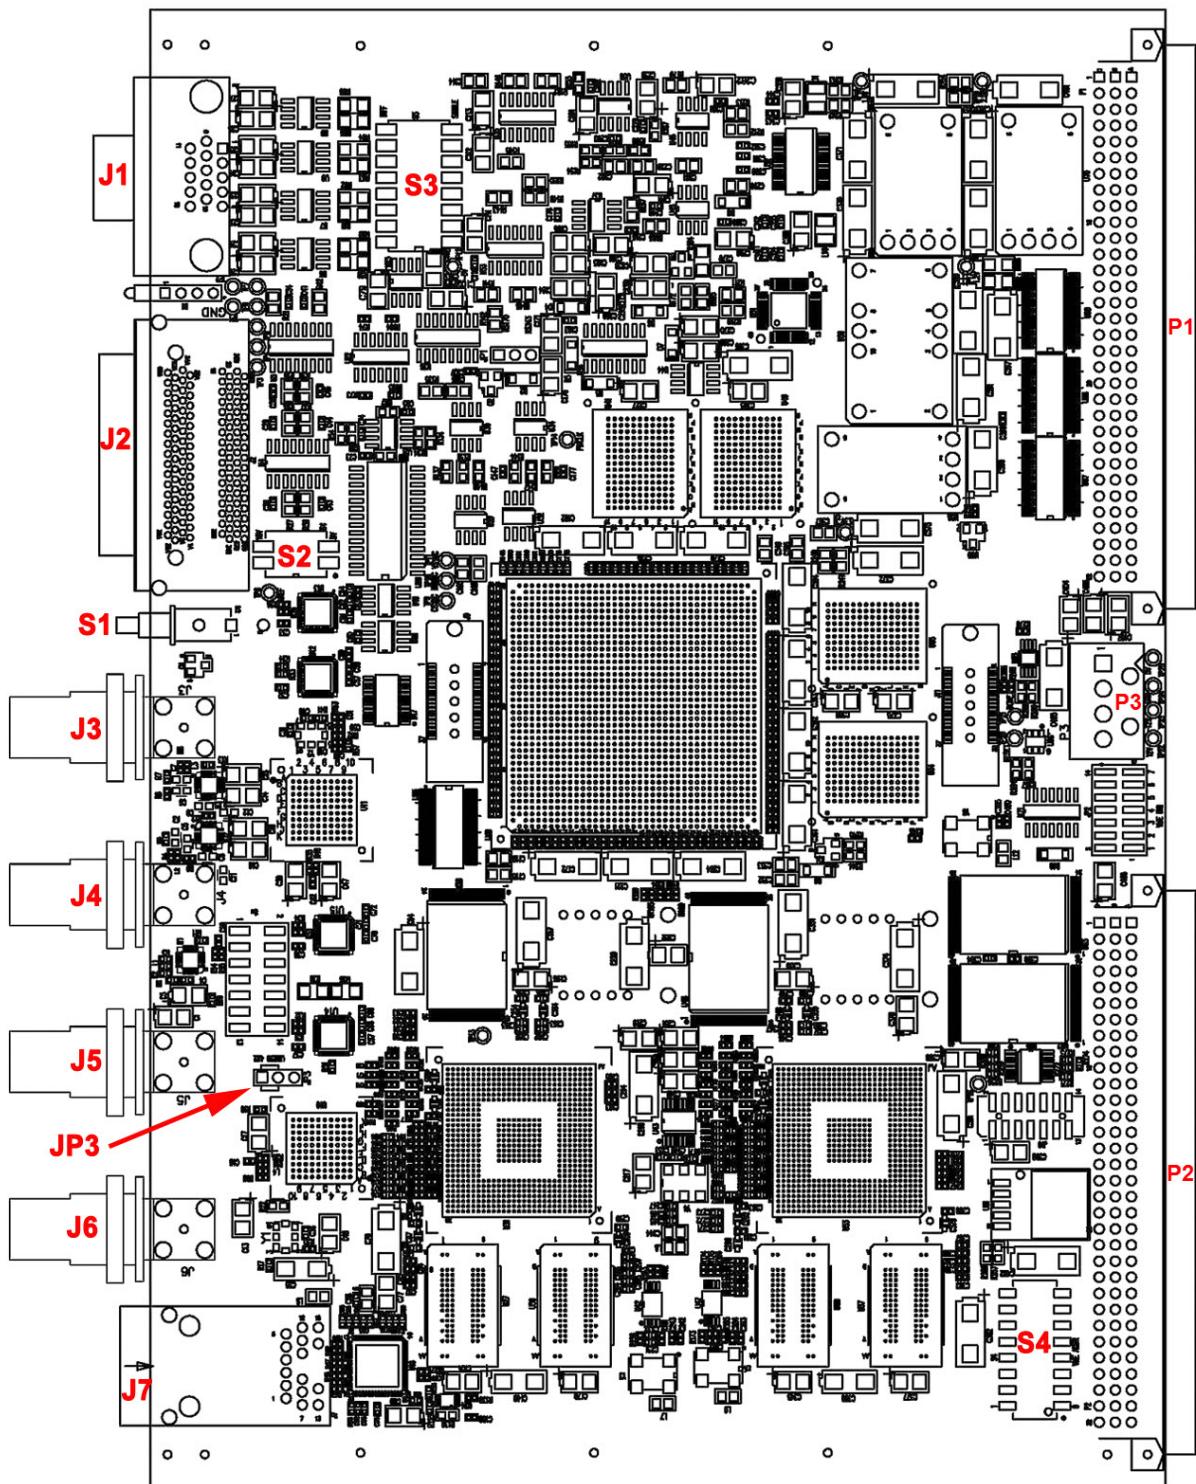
Model 7005-HD/7006-HD VMEbus Tracker Board Top Assembly
